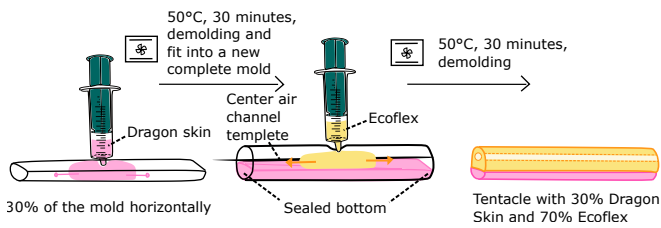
Fabrication process of a dual material soft robotic tentacle with off-axis air channel. Initial casting of Dragon Skin silicone (30% by volume) in a semi-cylindrical mold. Transfer of cured Dragon Skin component to a full cylindrical mold. Injection of Ecoflex (70% by volume) using a syringe to complete the tentacle structure. Final dual-material tentacle with Dragon Skin base (pink) and Ecoflex top layer (yellow).
